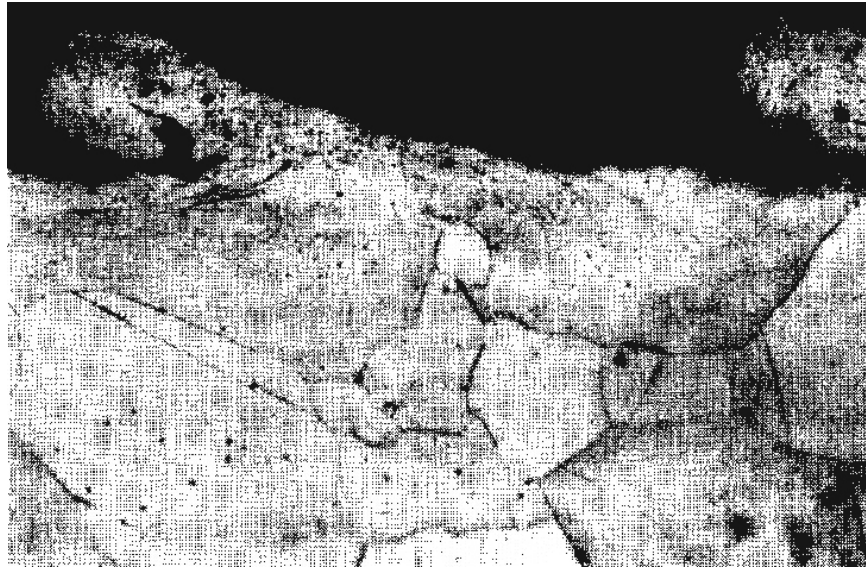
Tearing on the machined surface after cutting Inconel 718 (500×) [17]
